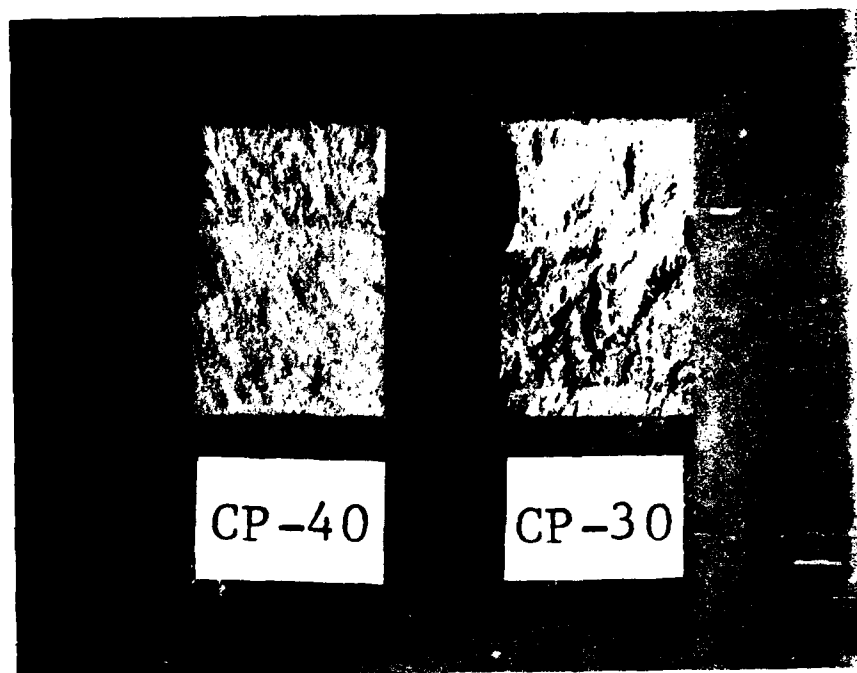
Fracture surface appearance of specimens CP30 and CP40 under TURB30 loading.
